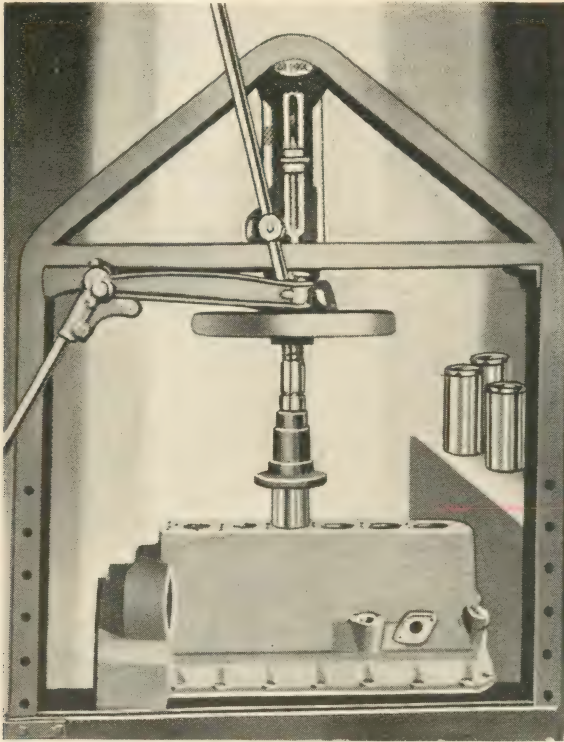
HYDRAULIC PRESS FOR INSERTING LINERS IN CYLINDER BLOCKS
